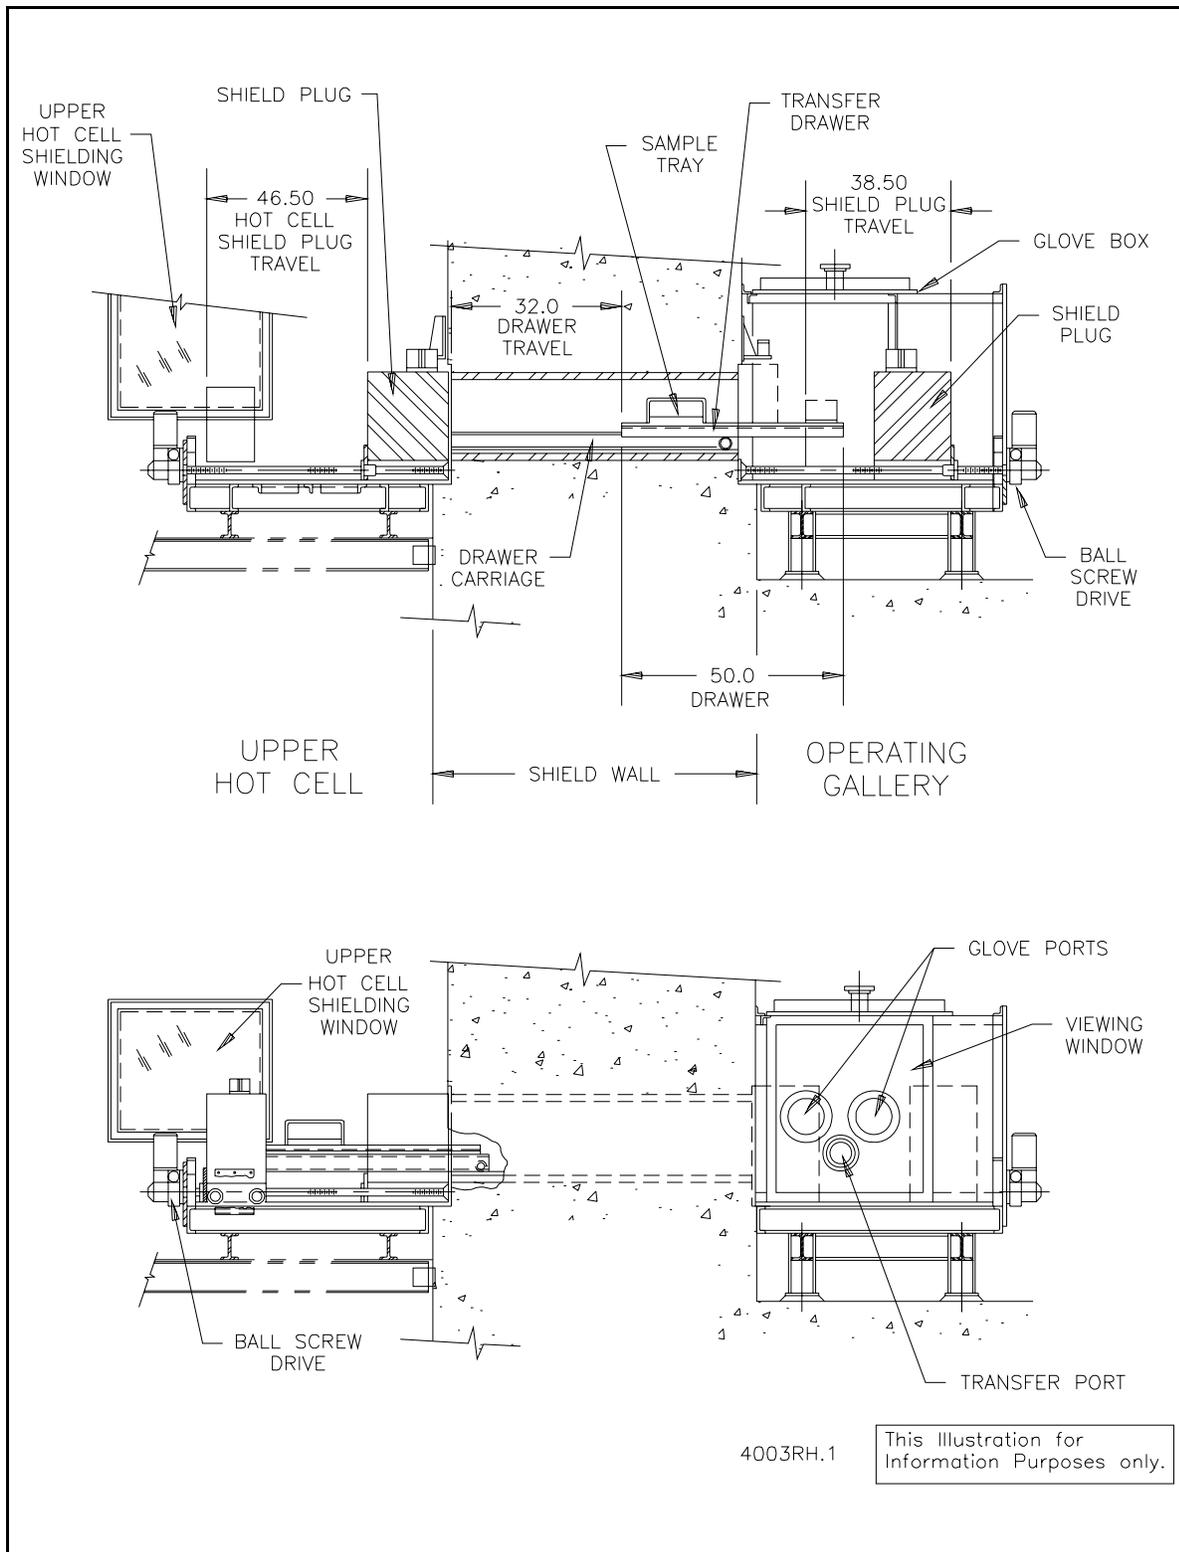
, Upper Hot Cell Transfer Drawer
